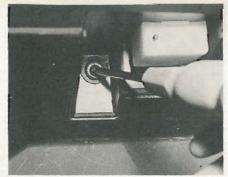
Dashboard assembly securing bolt locations (arrowed) left-hand drive model shown (Sec 32)
